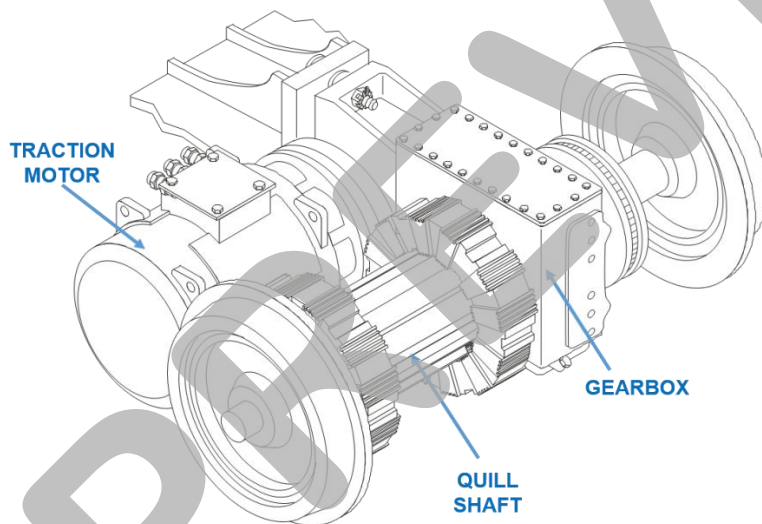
Gearbox, Quill Shaft, Traction Motor Arrangement on LRV Truck –Courtesy Denver RTD
